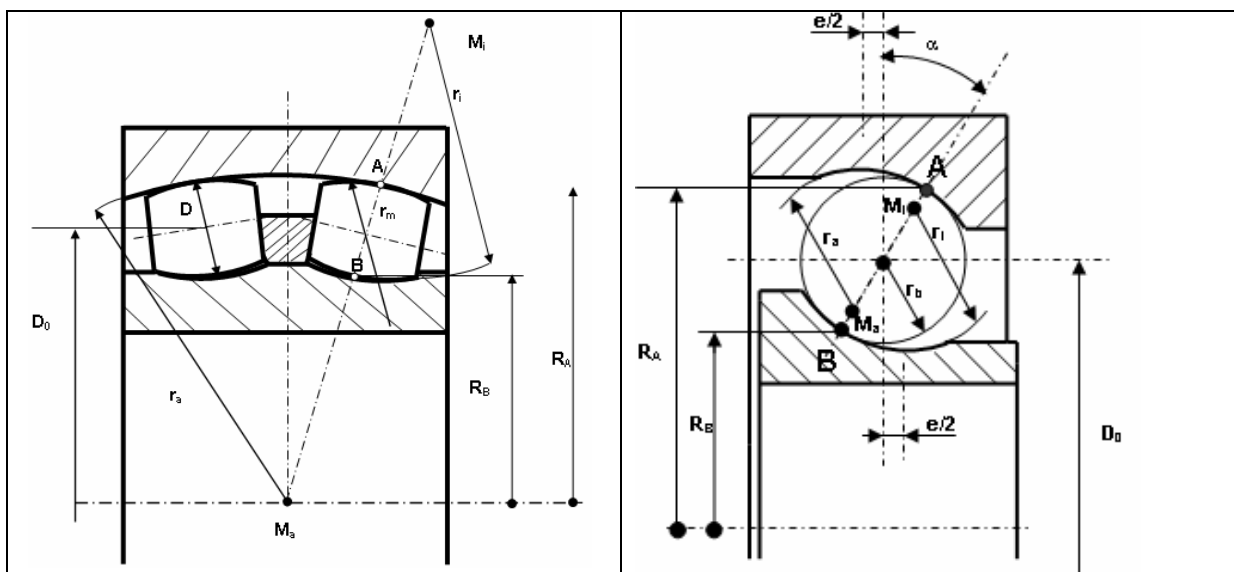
The geometries of spherical roller and angular contact bearings respectively [4,5,8].
